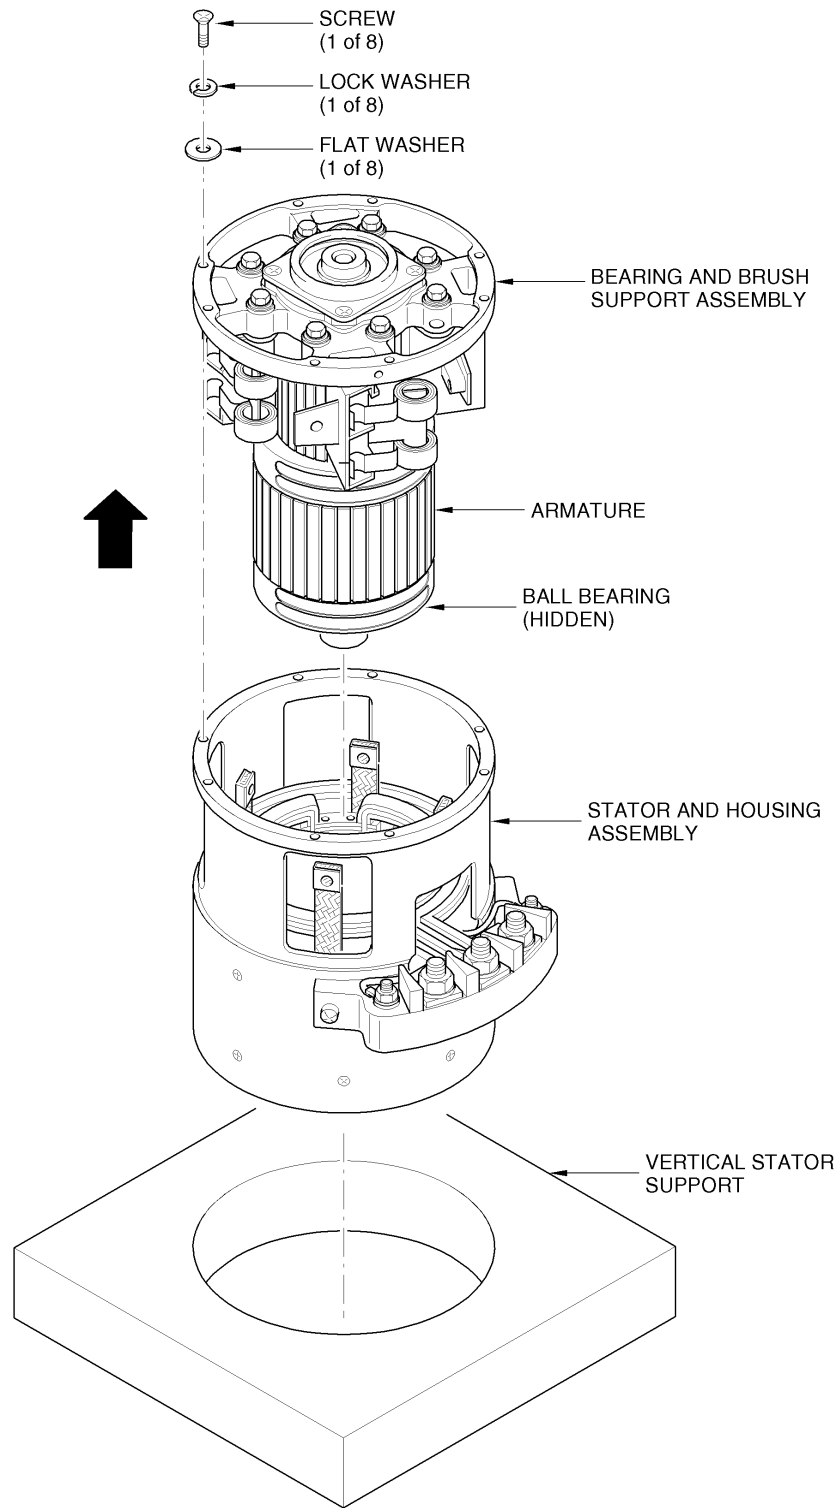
Removing Bearing and Brush Support Assembly with Attached Armature
